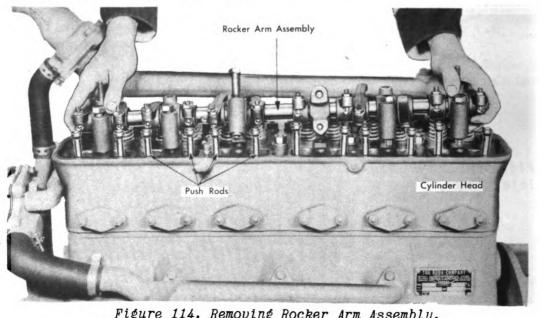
Removing Rocker Arm Assembly. Original from Digitized by GoogleMAINTENANCE SECTIONSITY OF CALIFORNIA
